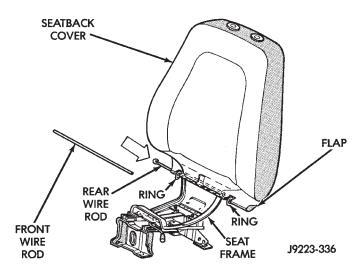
Seatback Cover-To-Frame Wire Rod Installation
